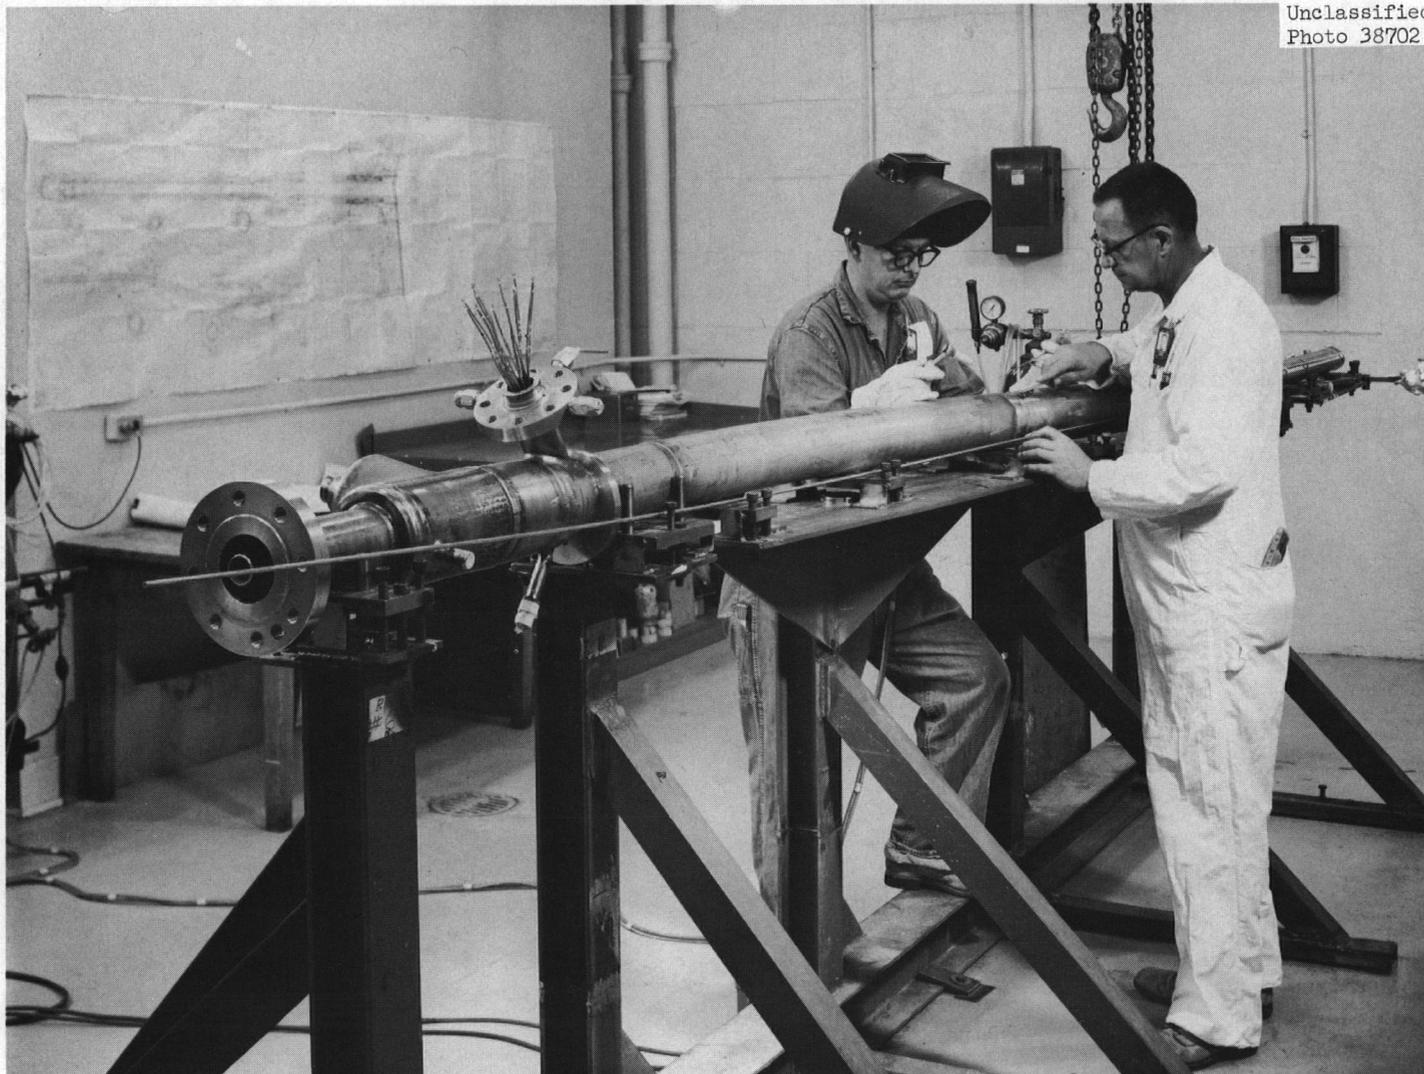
Loop 1-S In-Pile Section on Assembly Fixture.
